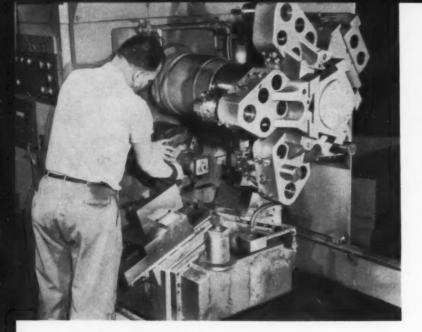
Cast part for a safety valve is being clamped in position for machining in an automatic-cycling chucking machine. Tools held in a fiveposition overhead turret and in two cross-slides operate on the work-piece.
